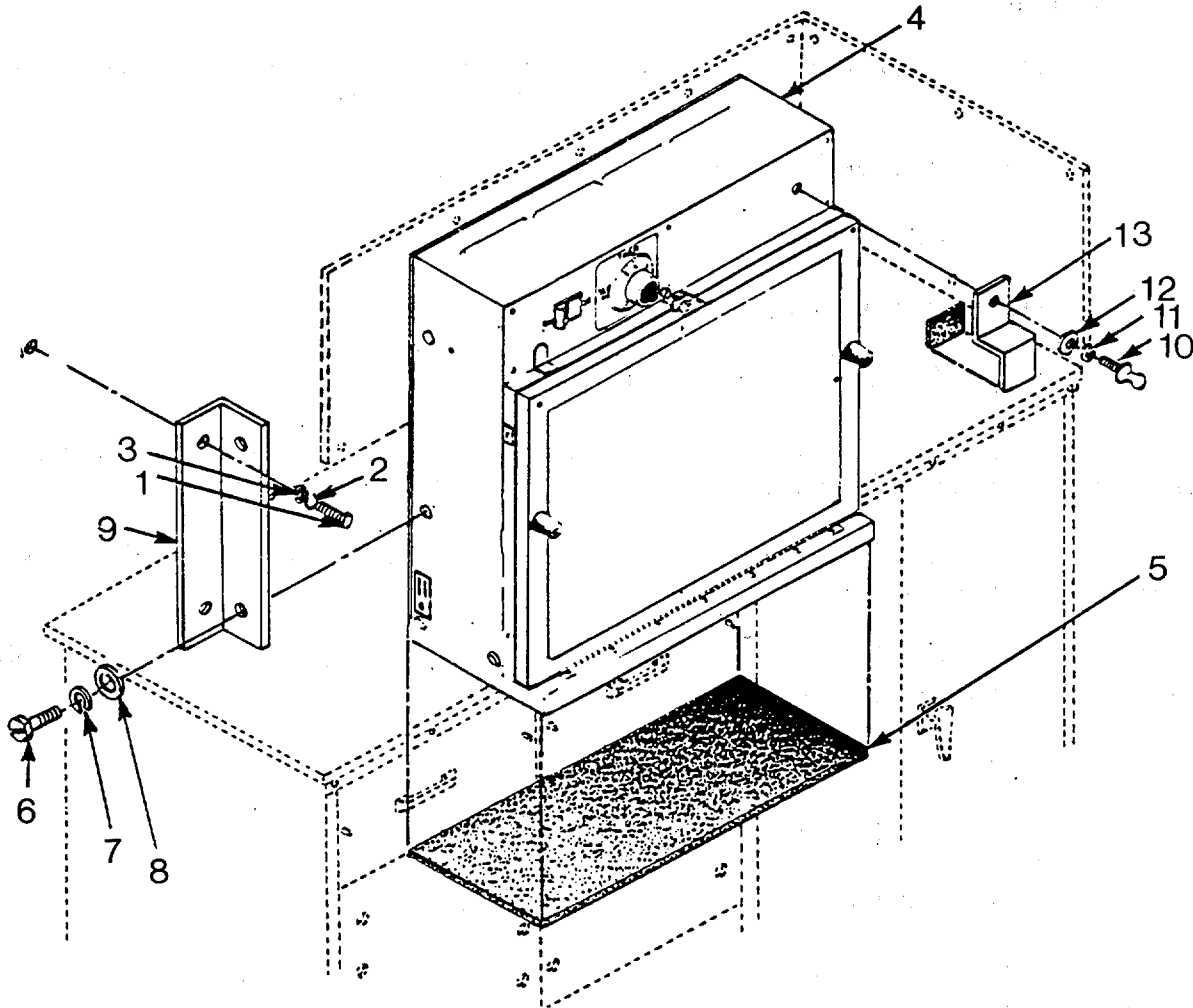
Vertical Vacuum Frame Assembly Frame
